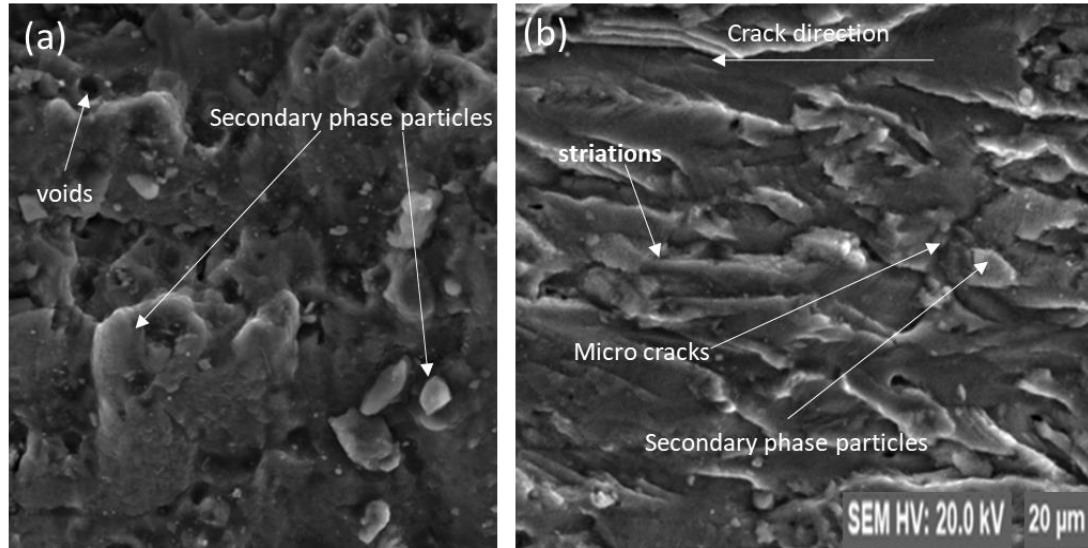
Fatigue crack initiation morphology of Al alloy 7075-T7, (a) countersunk rivet hole, (b) perpendicular rivet hole.
